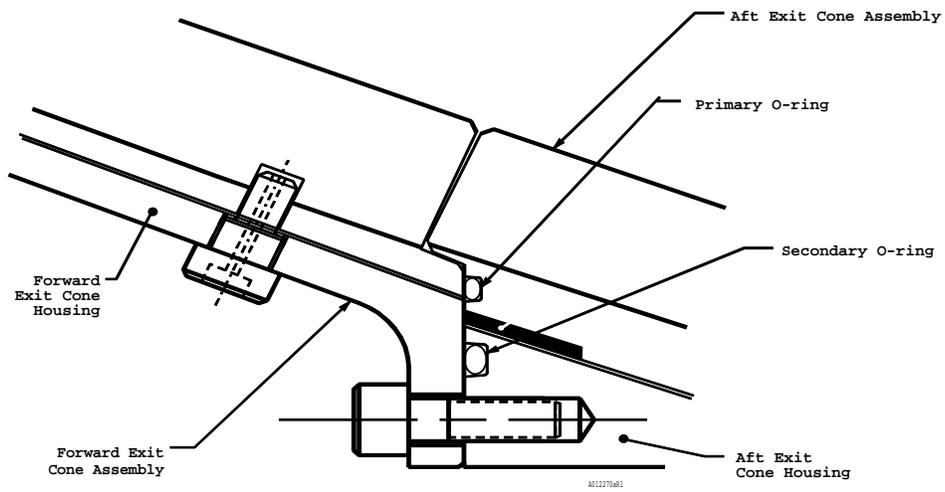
Forward-to-Aft Exit Cone Joint, Primary and Secondary O-Ring
